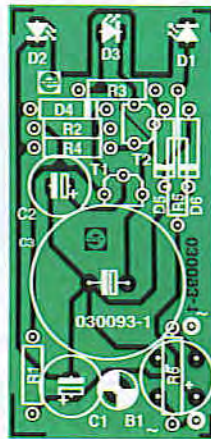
The small PCB is designed to fit into a standard rear light assembly.
